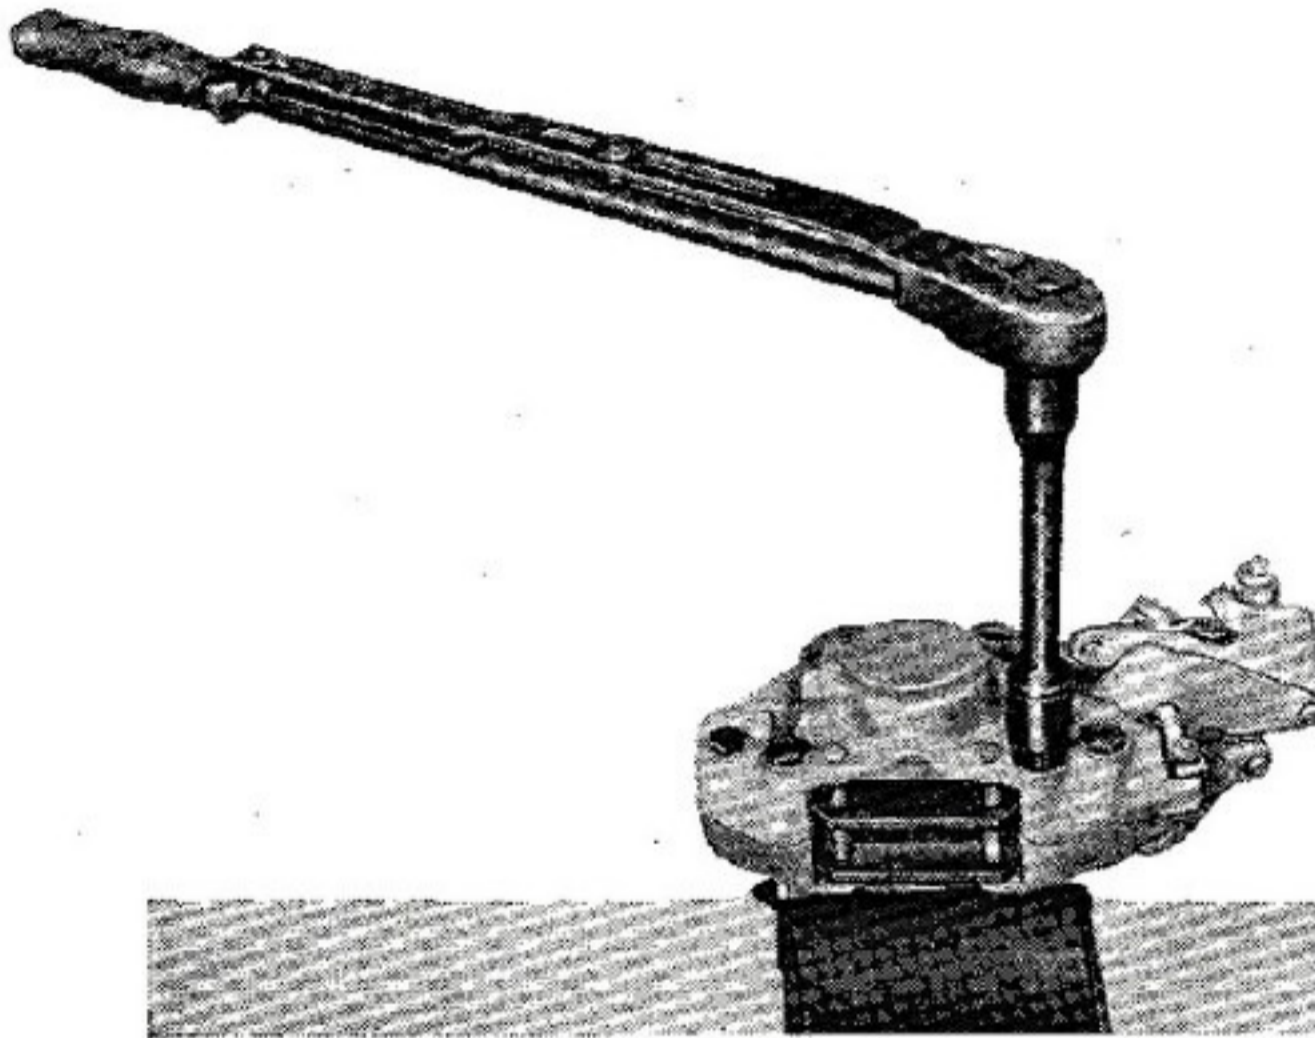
Tightening of the caliper halves joining bolts using a torque wrench.
